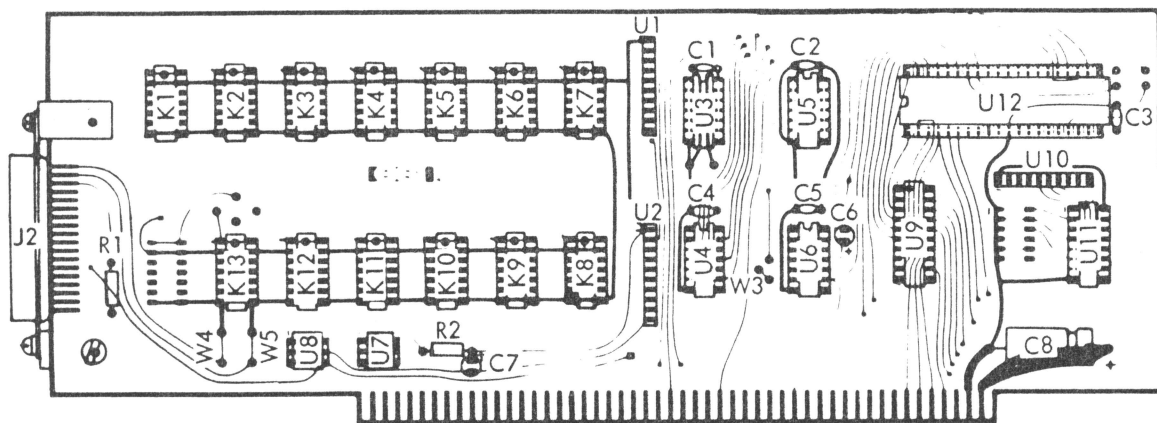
General Handler Interface Circuit Assembly (P/N 47895)
